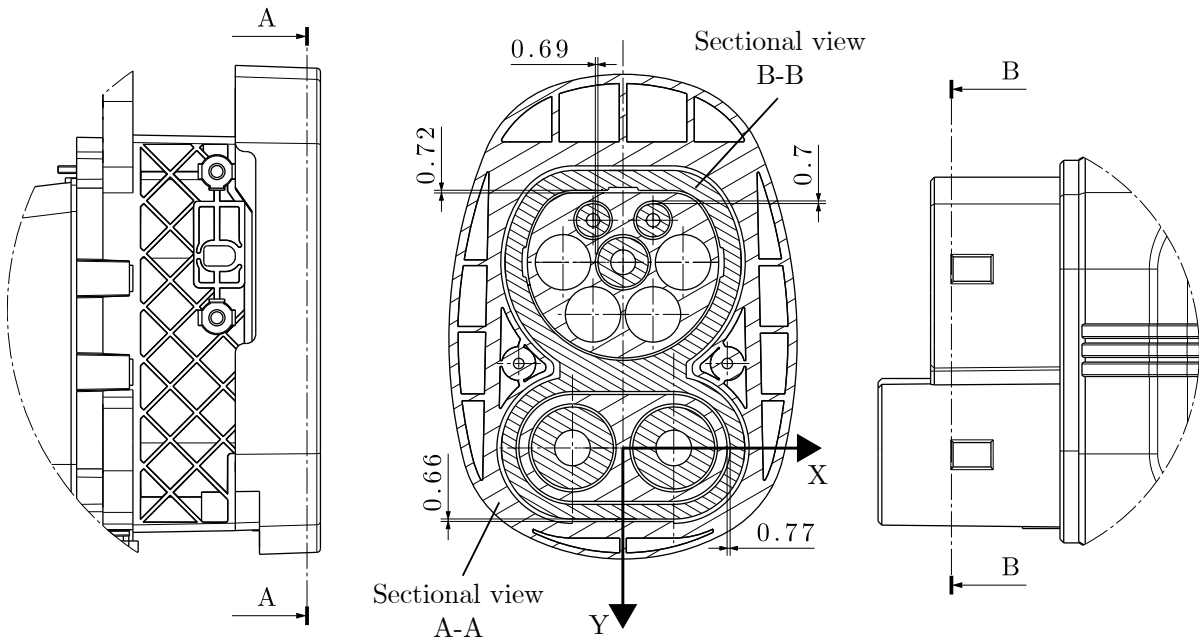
Left: Inlet CAD-model side view. Middle: Overlaid inlet and connector CAD-model sectional views representing the connection partners clearance. Right: Connector CAD-model side view.
